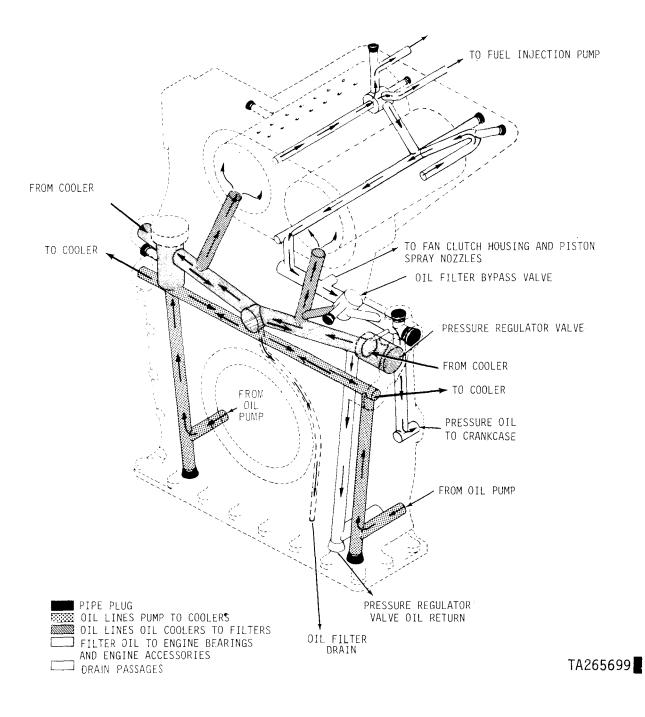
Crankshaft damper and oil filter housing oil passages.
